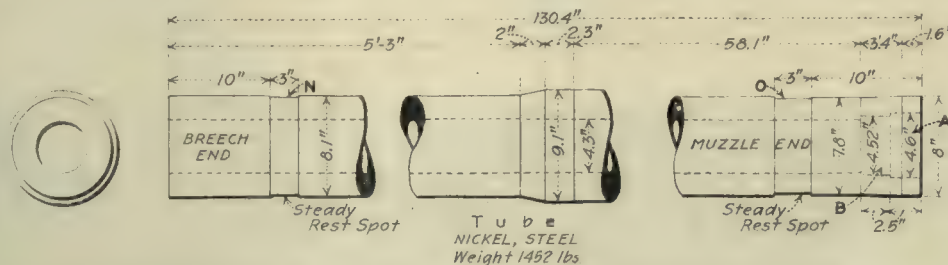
ROUGH-BORED AND TURNED TUBE FORGING FOR THE 4.7-IN. GUN
